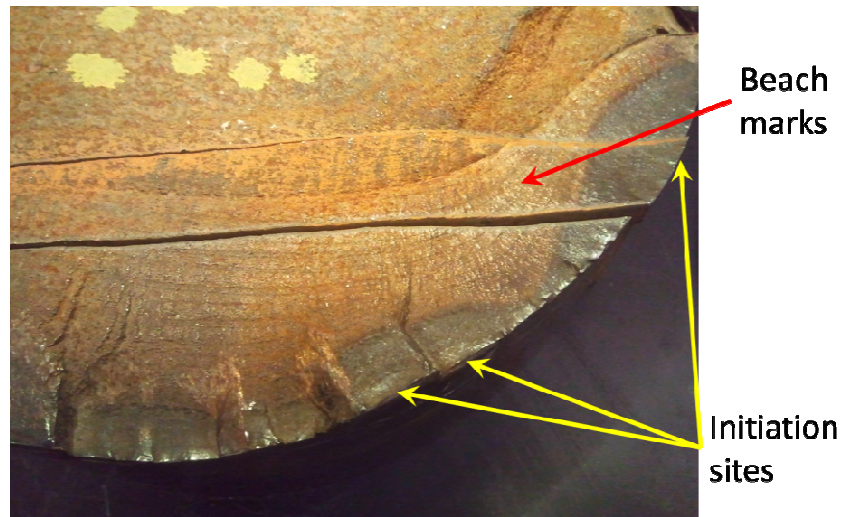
The fracture surface of this 7 $\frac{1}{2}$  mandrel displays all three fatigue fracture stages. The origin of the fracture is identified with an arrow. The fracture then propagated up to the shear lip, which was the last section of the mandrel to fracture.
